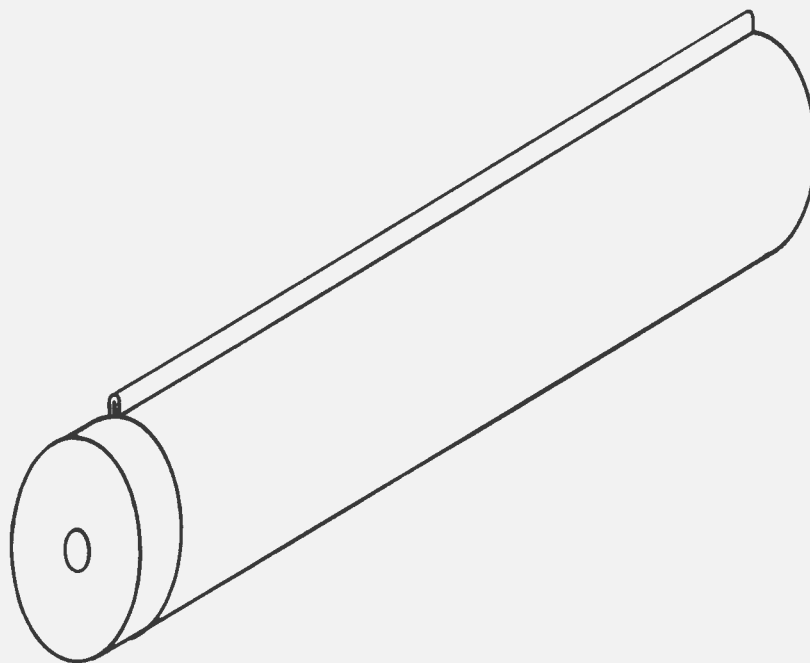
Brass mandrel with folded tantalum foil cylinder.
